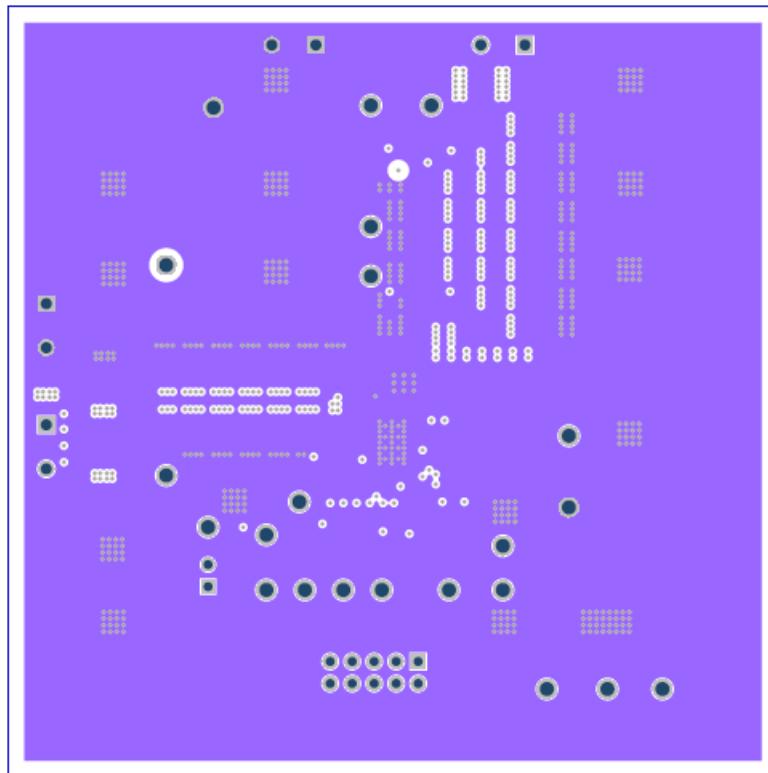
PWR-847EVM Inner Layer 4 (Top View)
